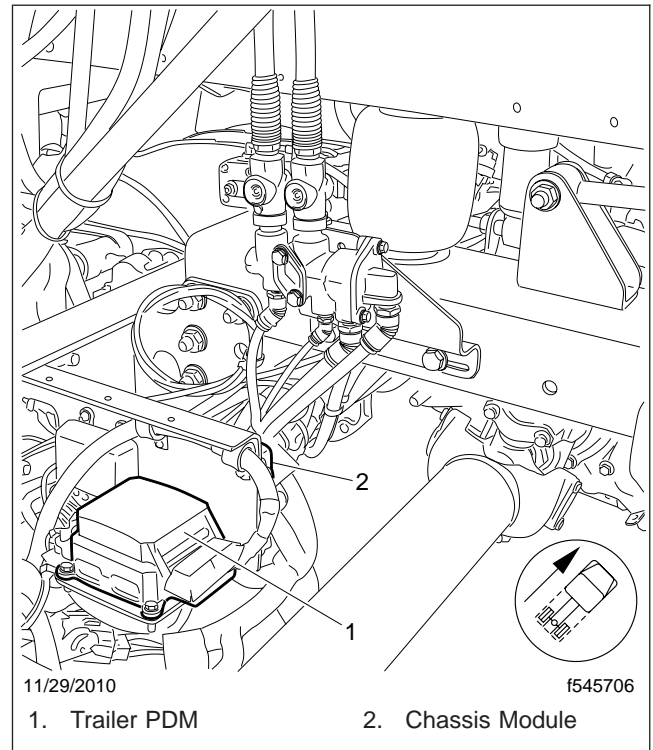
, Typical EPA07 Trailer PDM (deck plate removed)
